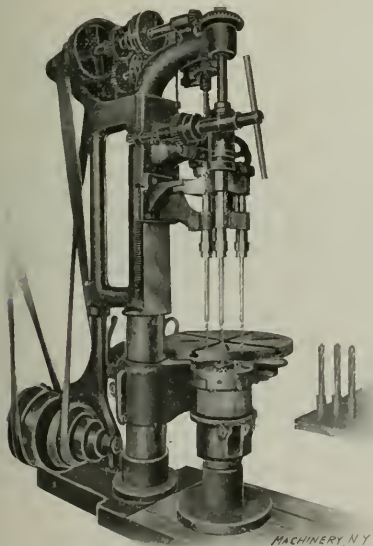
Drill Press with Three-spindle Drilling Attachment.
